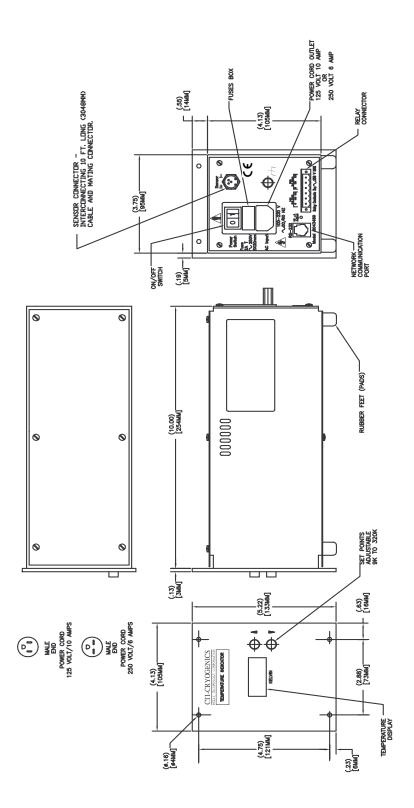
Cryo-Torr Temperature Indicator and Dimensions
